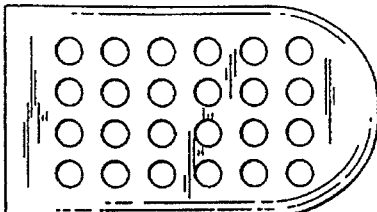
is a right side elevational view of the design of FIG. 1;
